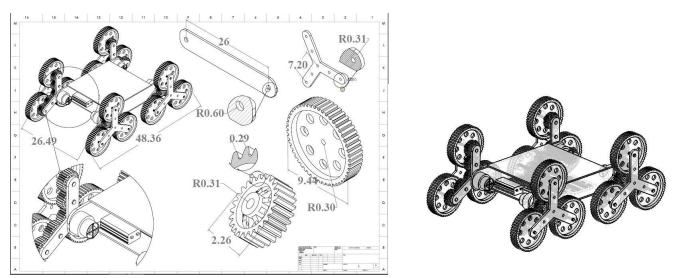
Draft sheet (dimensions in cm) and wire frame view
